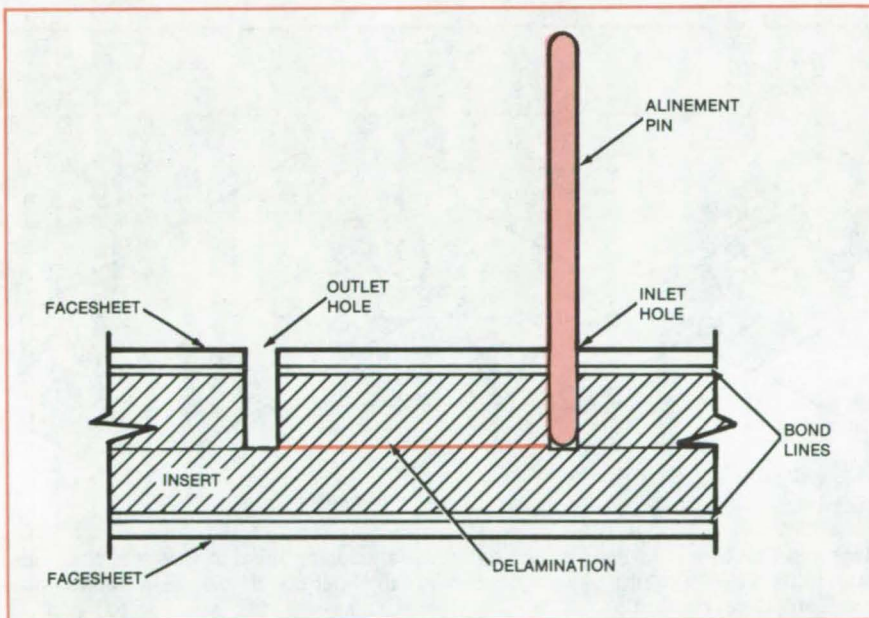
After Inlet and Outlet Holes Have Been Drilled to the proper depth, an alignment pin is inserted in the inlet hole.
